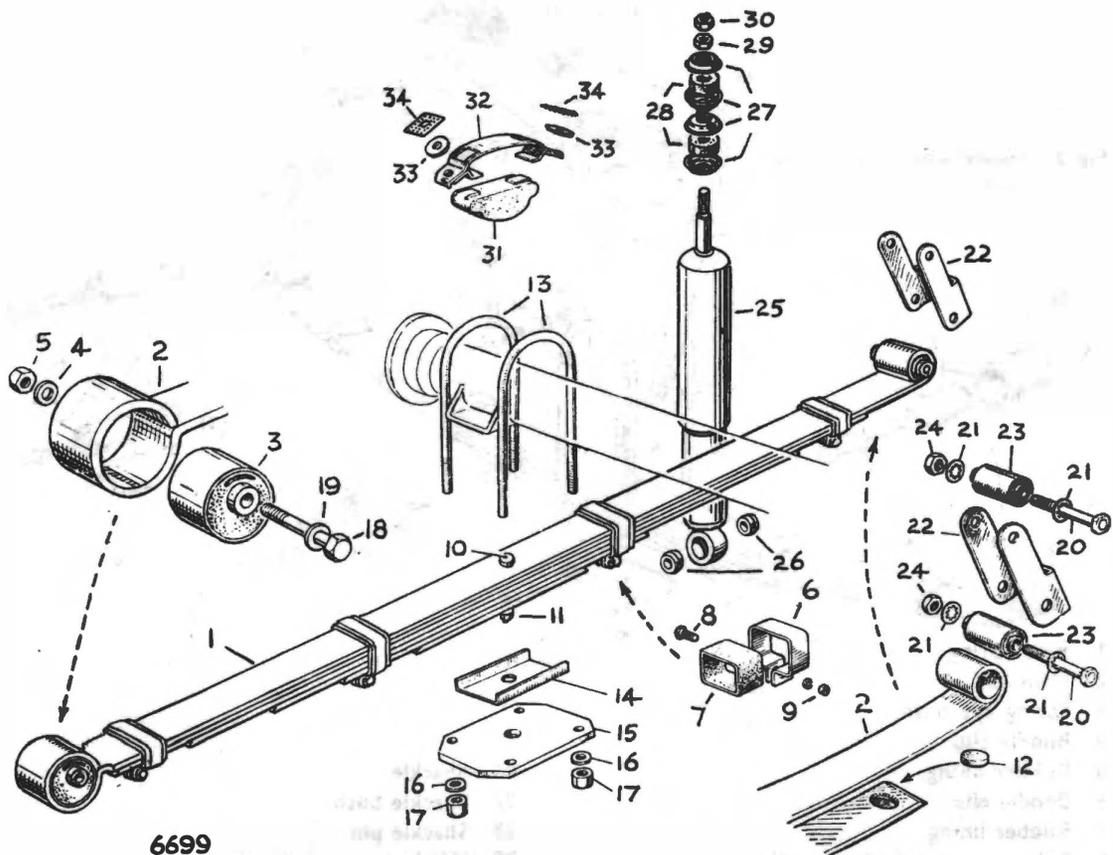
Exploded view of rear suspension (with eccentric bush)
